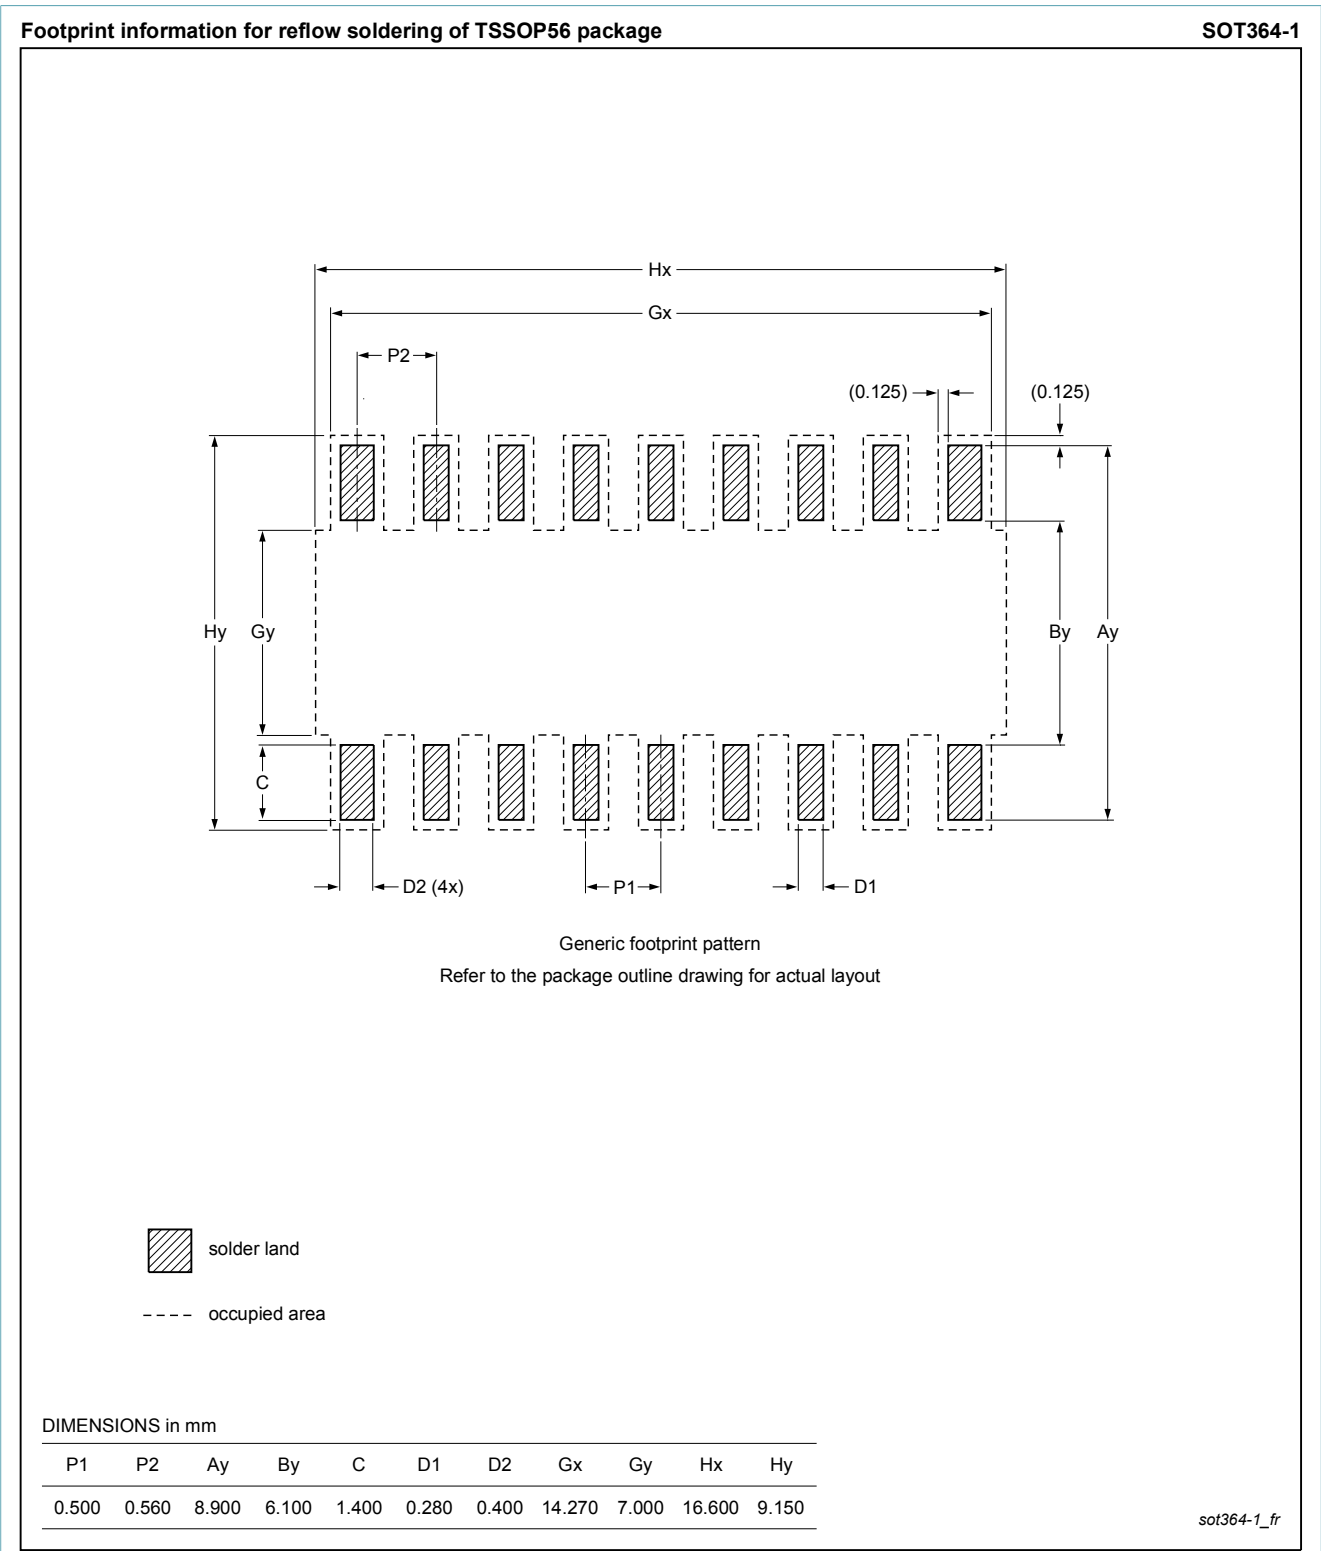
Reflow soldering footprint for TSSOP56 (SOT364-1)
